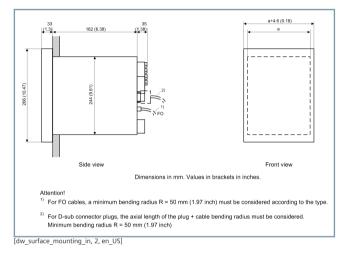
/13 Flush-Mounting Devices, Dimensions from the Side and Front Views
